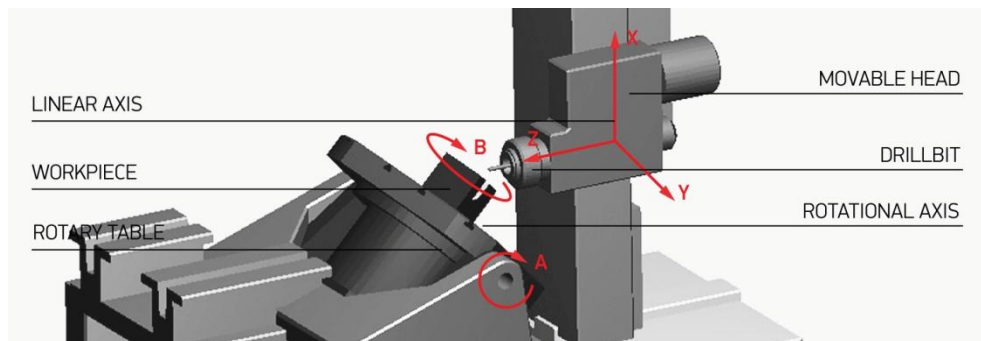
5-axis vertical CNC milling machine parameters and elements
